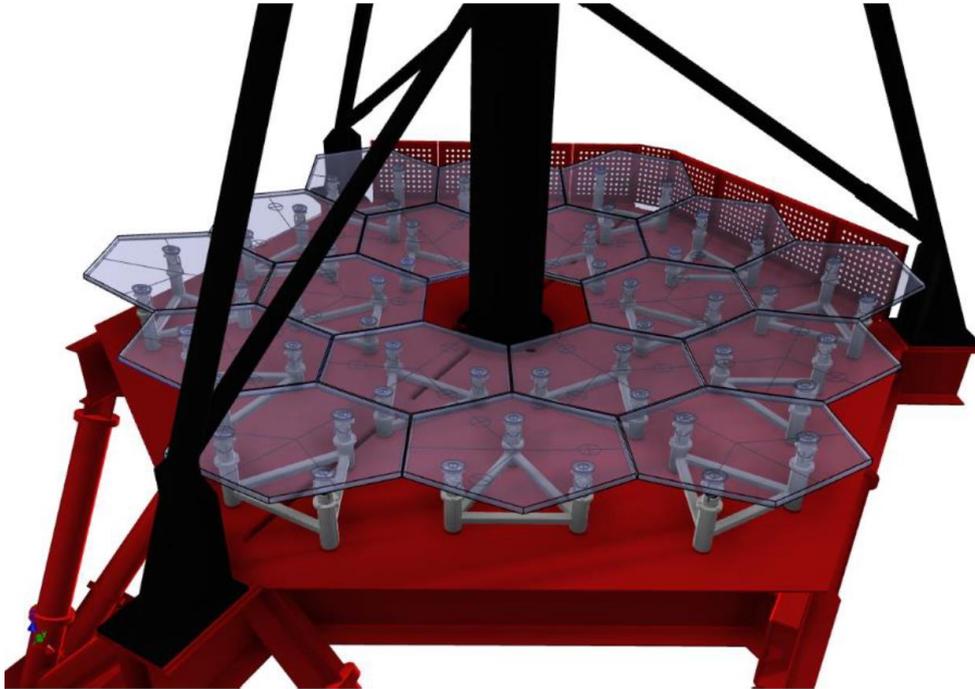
M1 segments support assembly view with transparent M1 (courtesy of EIE)
